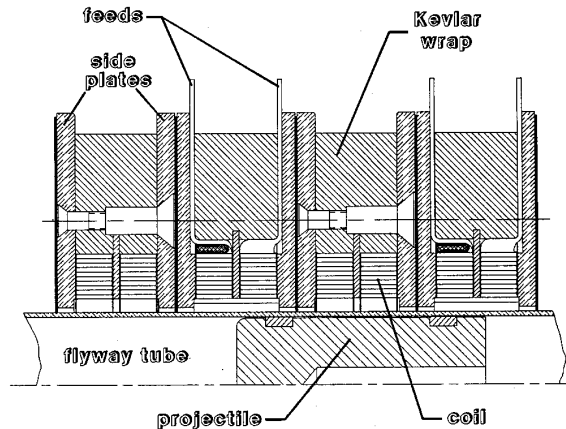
Section view of 4 coils as stacked in gun with flyway tube and projectile.
